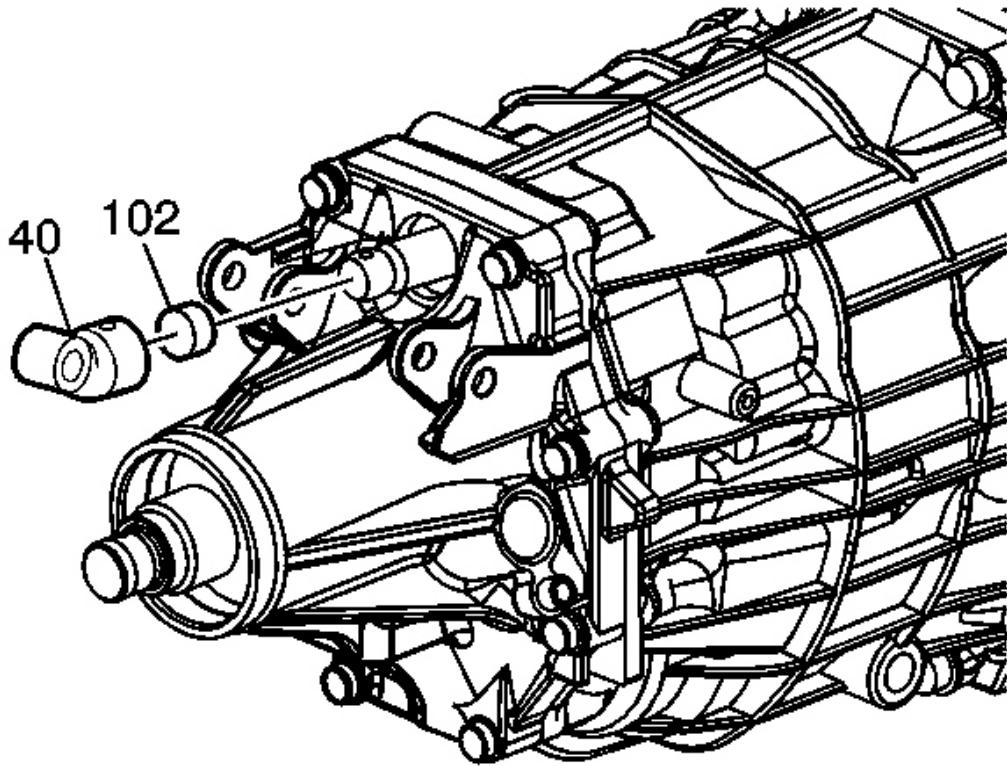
Identifying Dampener & Shift Lever Rod Universal Joint
